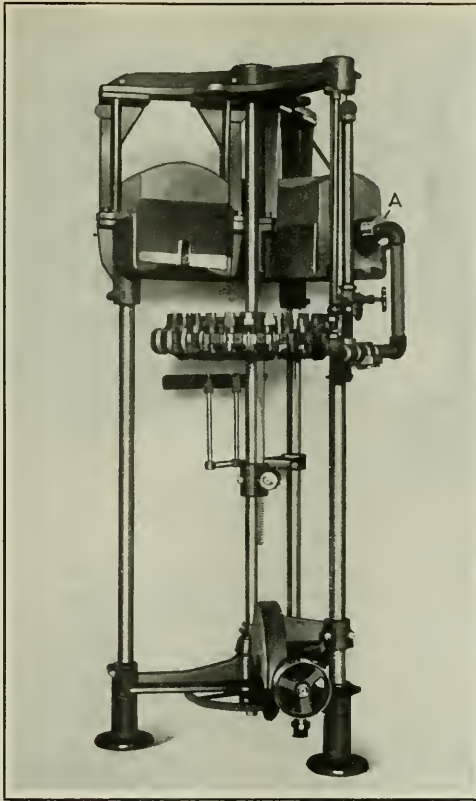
Rotary Gas Furnace in which the Blanks are heated at the End prior to swaging
